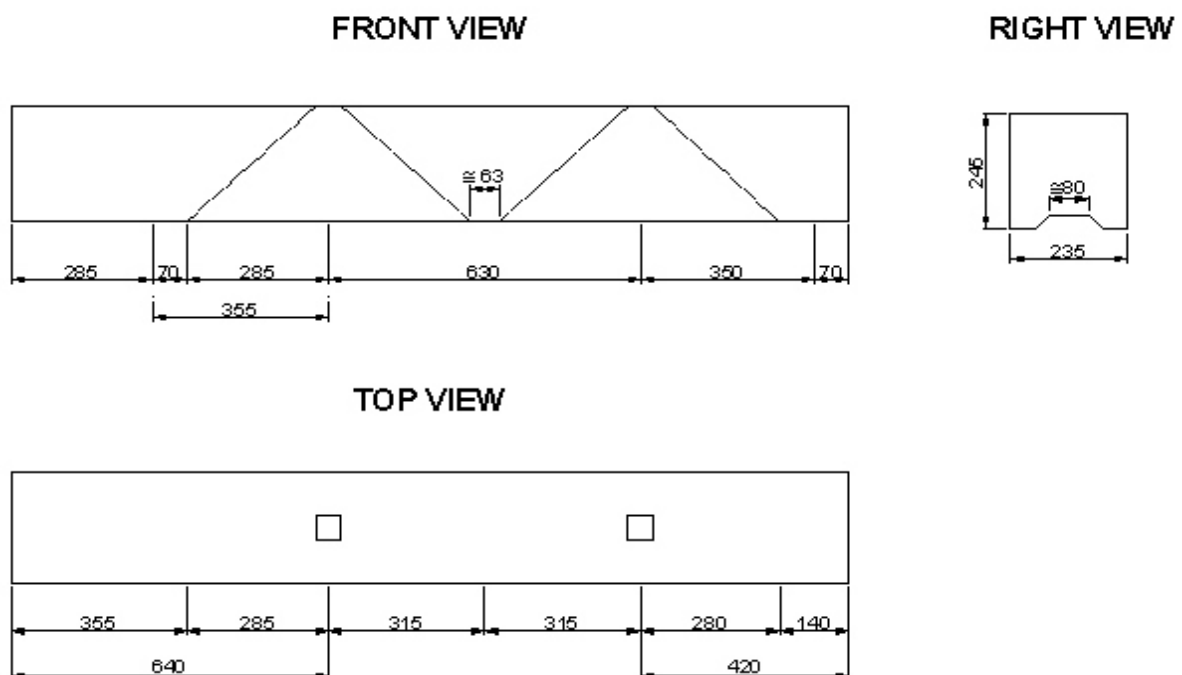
Geometry and main dimensions of the lathe bed prototype (units in mm).
